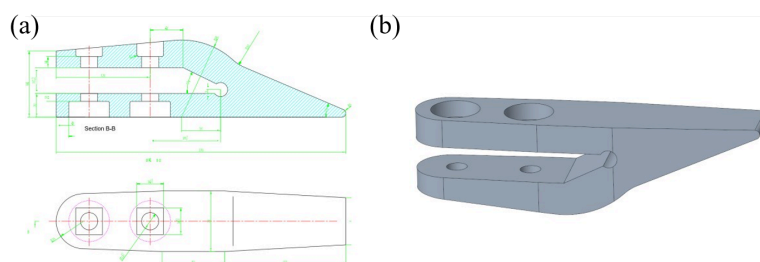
Two-dimensional drawing and three-dimensional model of the bucket tooth
